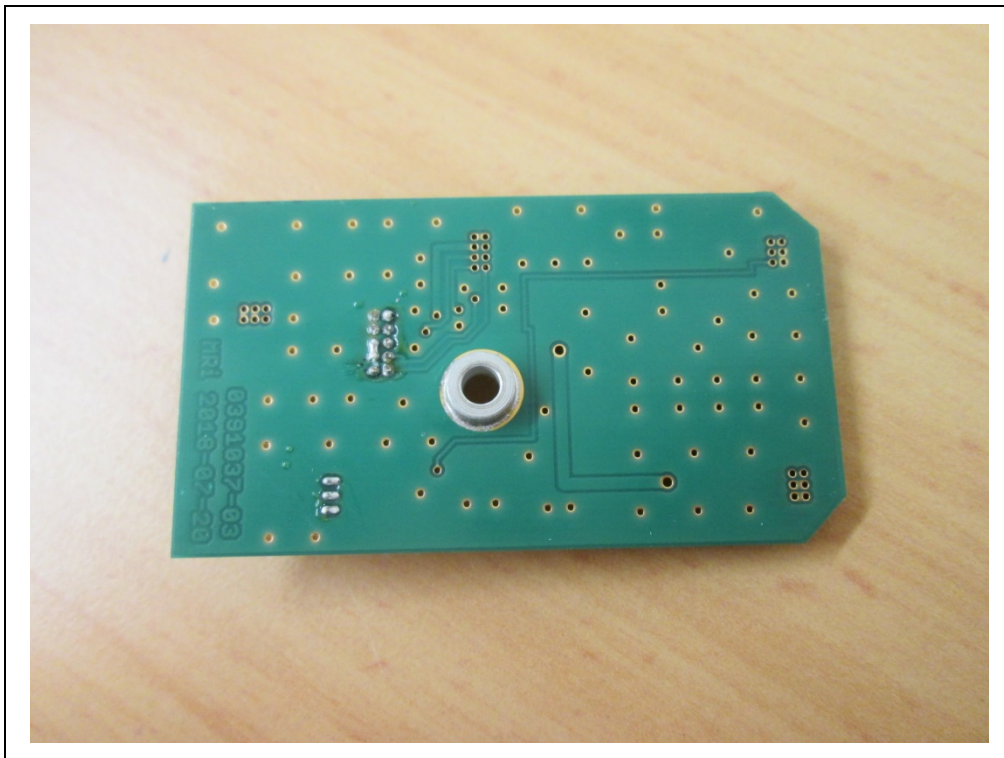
EUT#2 view of PCB 1 side 2 with connected sensor
